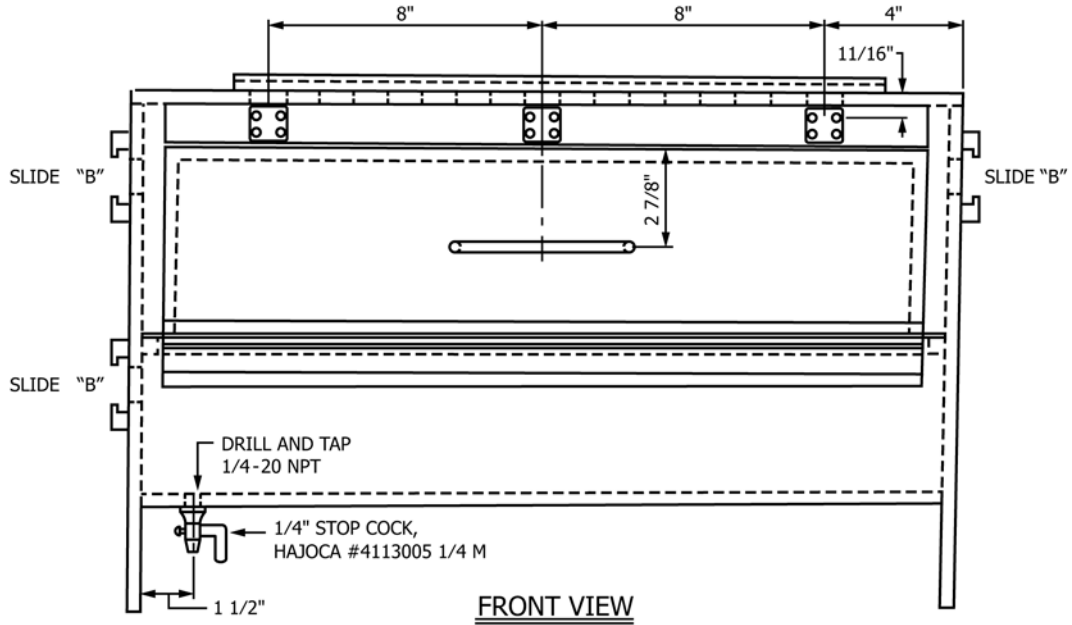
Testing Chamber Drawing — Figure 1a
